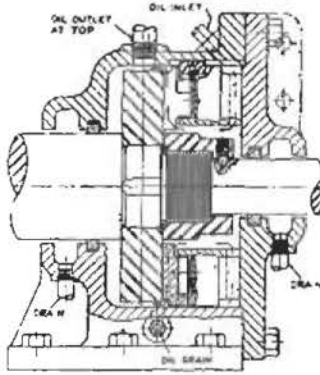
Simple mounting for single horizontal thrust bearing, Style JH, BH or NH. Forced lubrication is used. Base flange is provided for attachment to machine.
